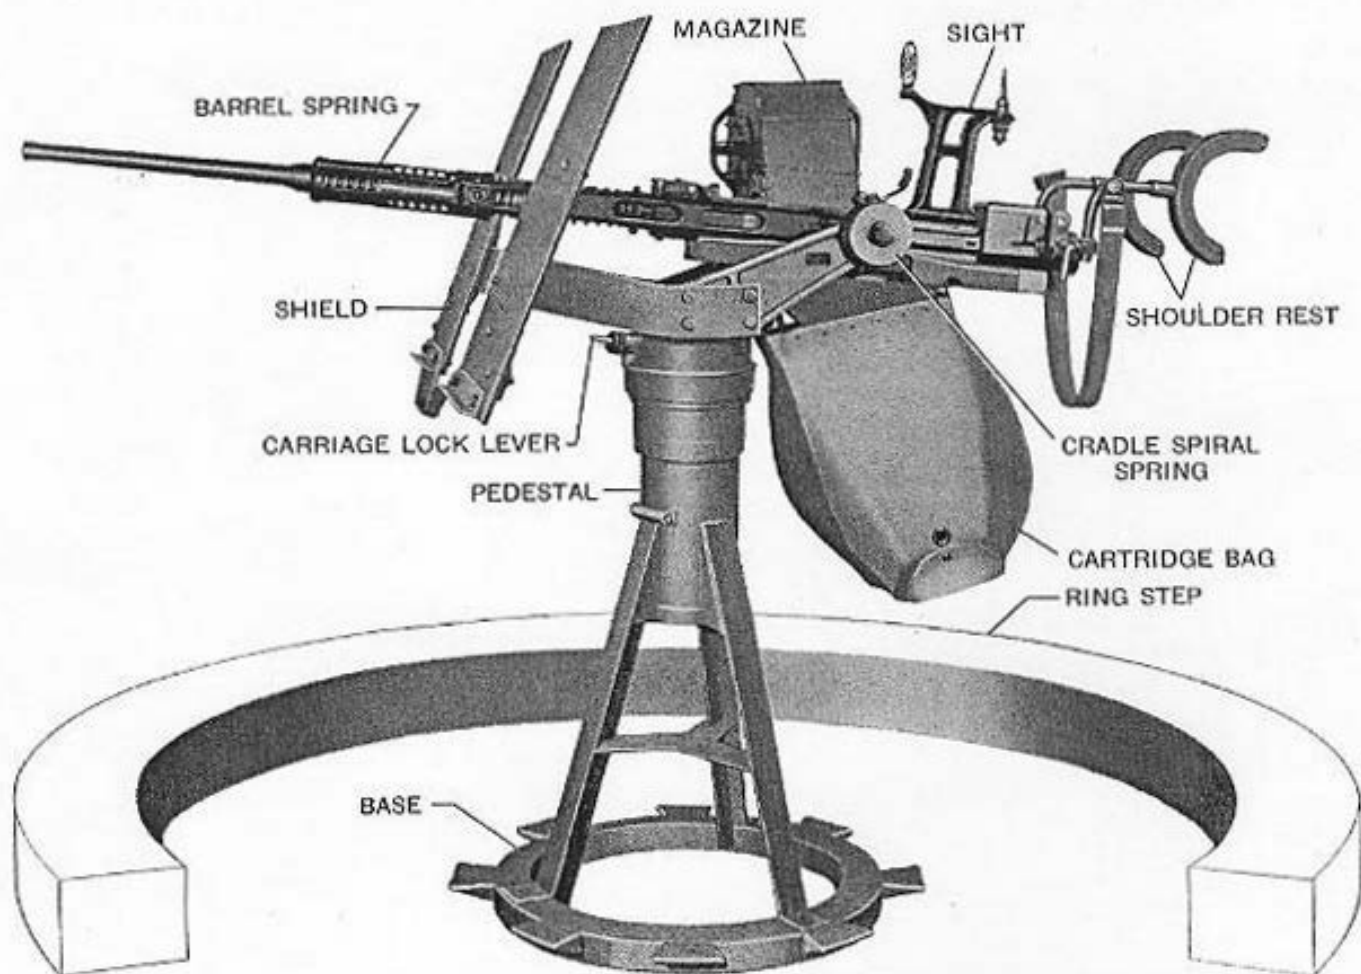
Exterior view showing general arrangement of the 20 mm. A.A. Gun and Mount Mark 10
